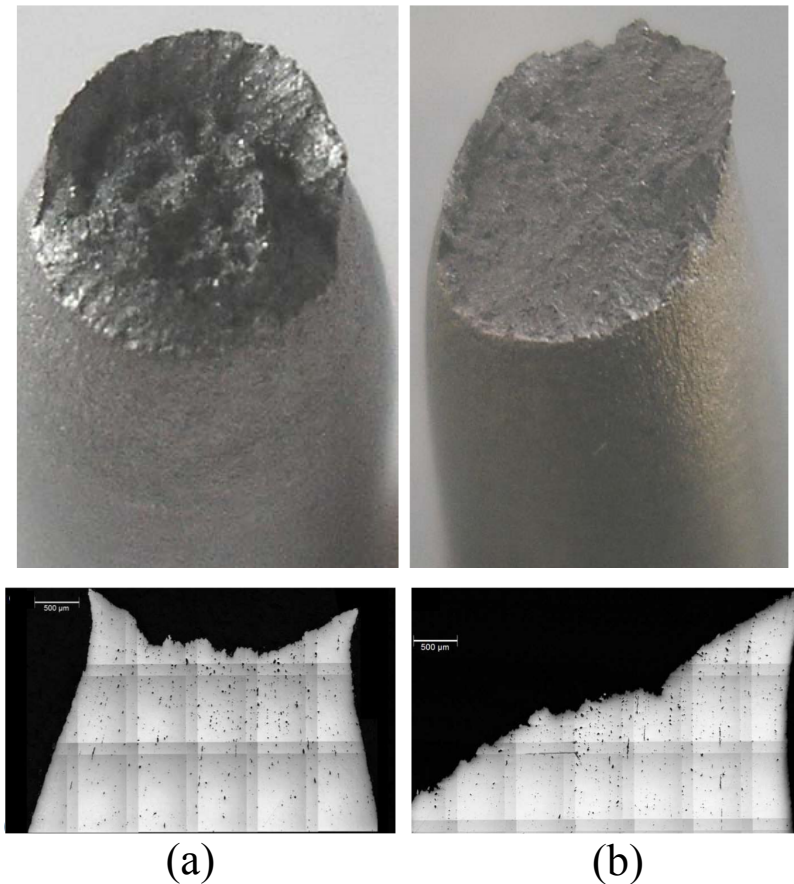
Fracture surfaces of TU48C steel axisymmetric tensile specimens tested at (a) 20°C and (b) 200°C [Belotteau, 2009].
